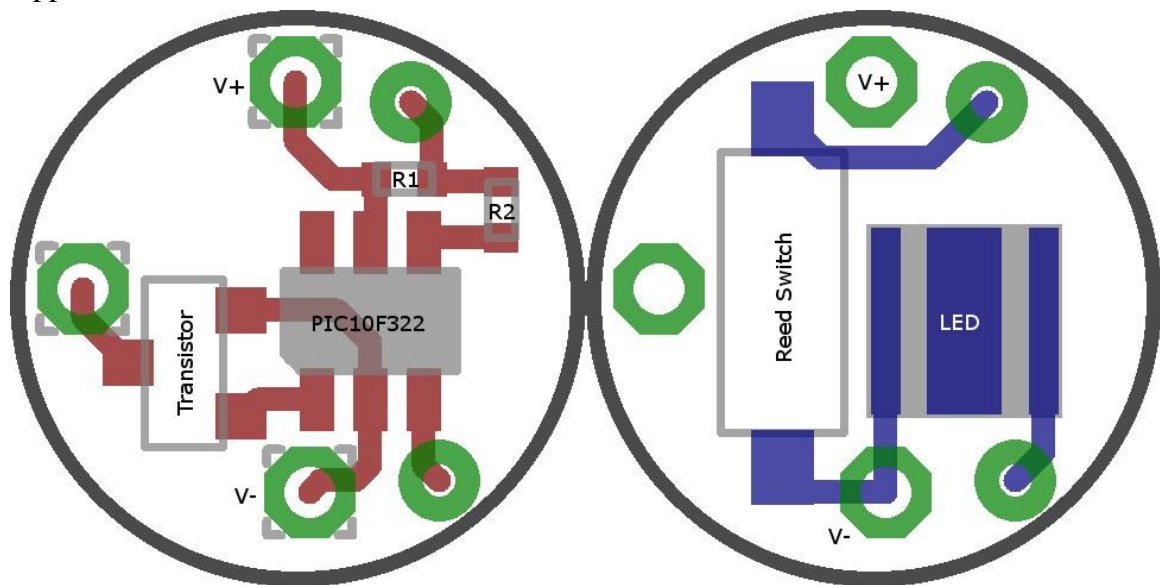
4: Capsule PCB layout. R1 = 1k Ohms and R2 = 10k Ohms
